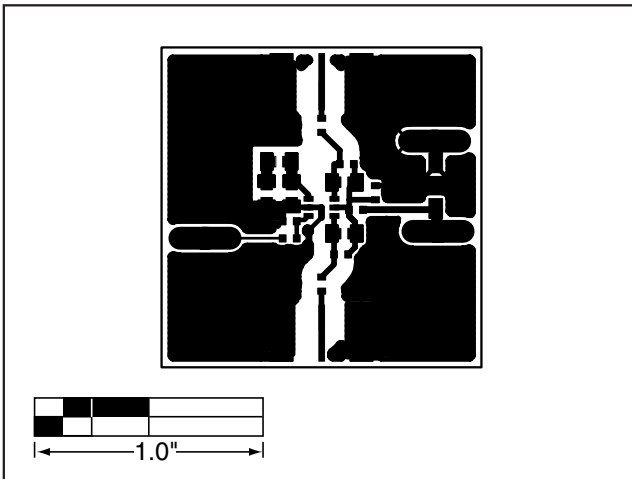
MAX2605/MAX2606/MAX2607 EV Kits PC Board Layout—Component Side
